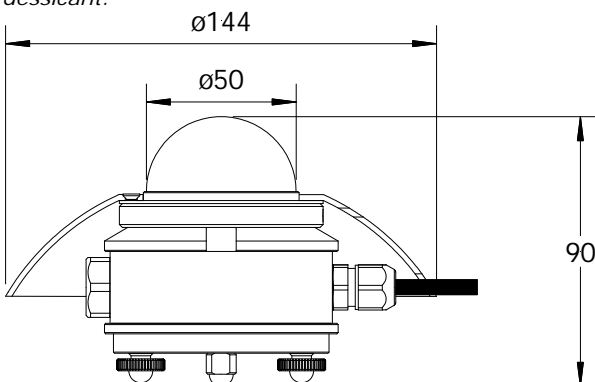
SR11 dimensions in mm. Standard cable length is 5 m. Cable can be installed / replaced by the user.
